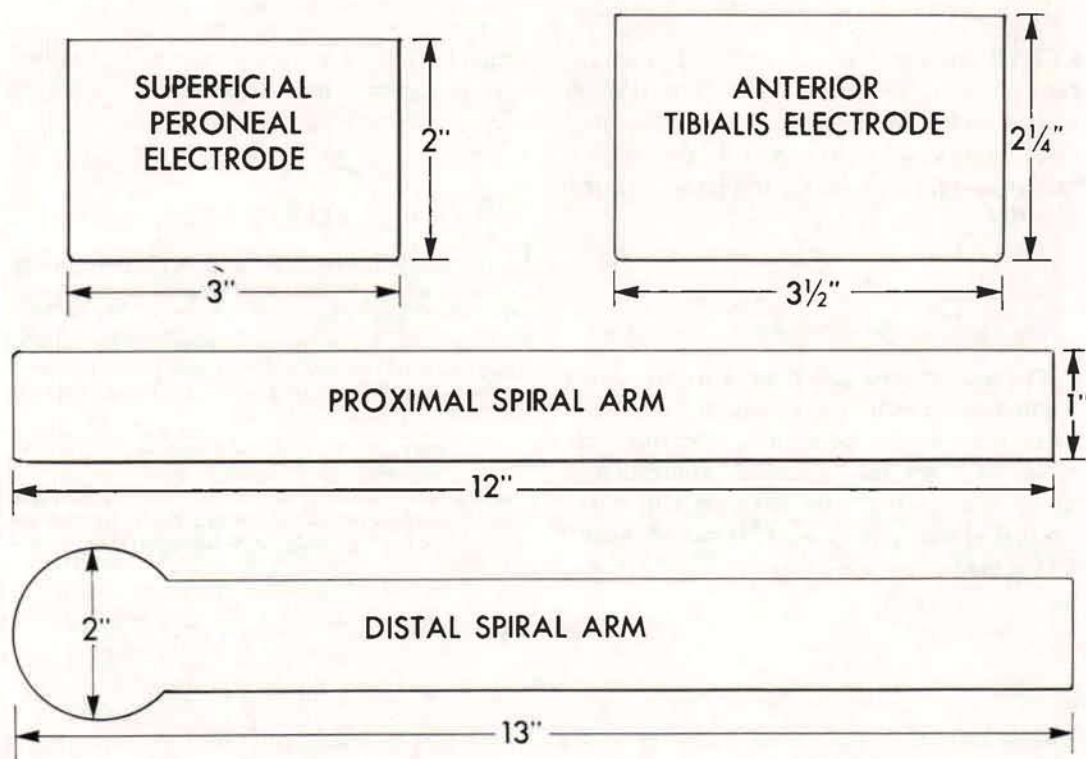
Dimensions of templates for use in fabrication of the spiral retention clip.
